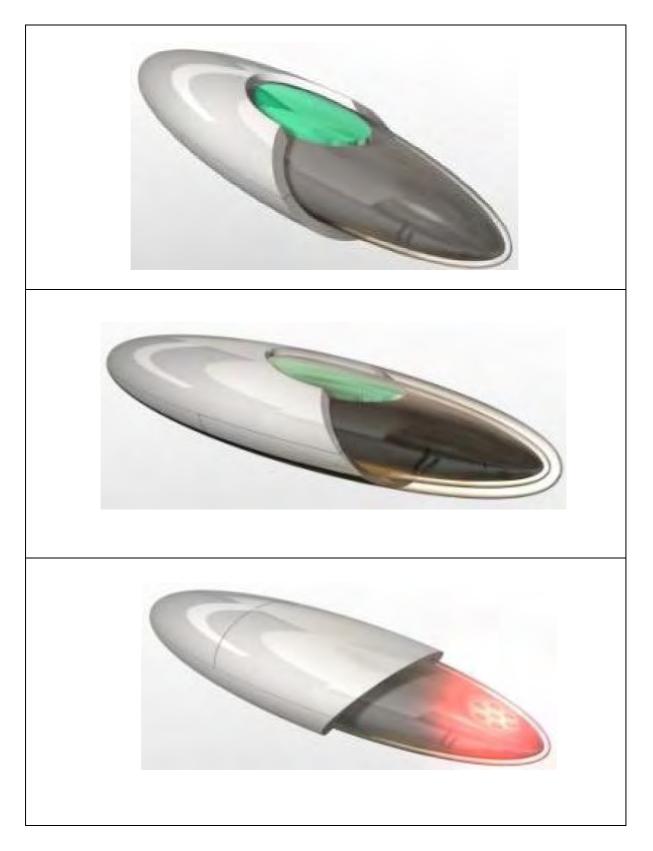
CAD Model of Hand Held Cold Sore Treatment Wand for Injection Moulding
